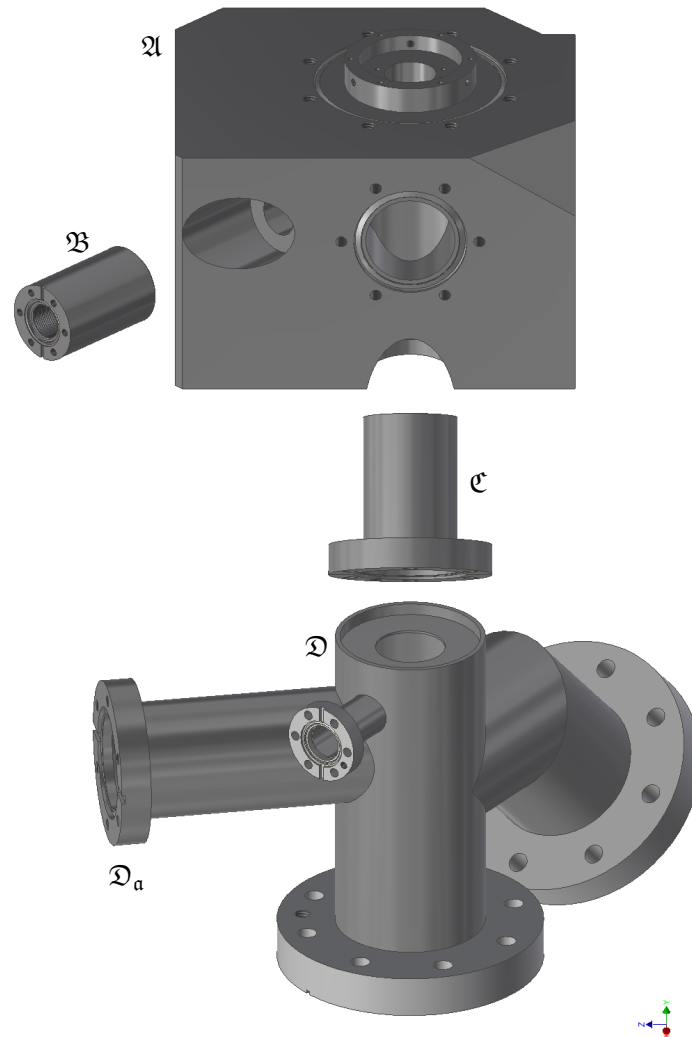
Assembly of the Beam Housing — Several pieces are welded into the block shaped main part (\mathfrak{A}) of the molecular beam. The laser port (\mathfrak{B}) is located left, the valve port (\mathfrak{C}) sticks out to the front and the tube part (\mathfrak{D}) of the beam is attached from below. The tapped 40CF flange (\mathfrak{D}_a) is modified to fit a $\varnothing 50$ mm tube. Otherwise, standard components are used.
